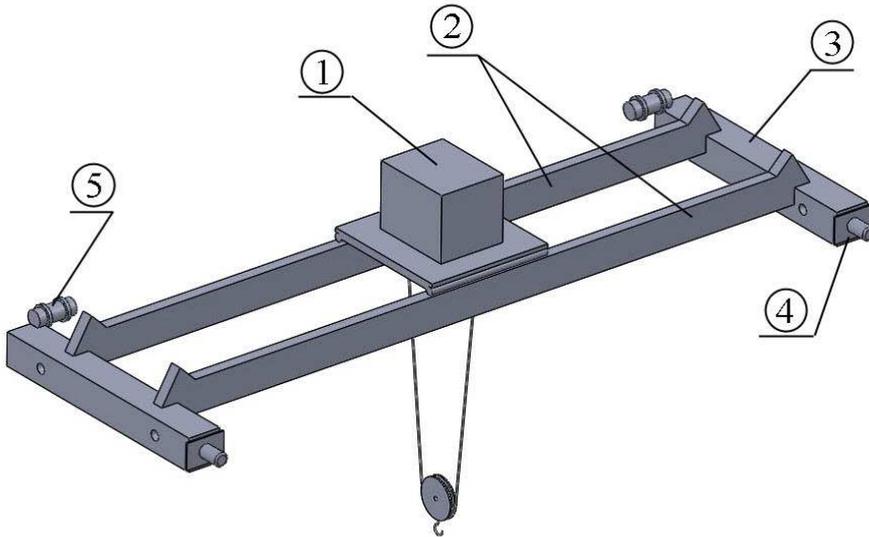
Diagram of double-girder overhead travelling crane; 1 – crab with hoist, 2 – crane bridge girder, 3 – front beam, 4 – bridge drive, 5 – bumper
